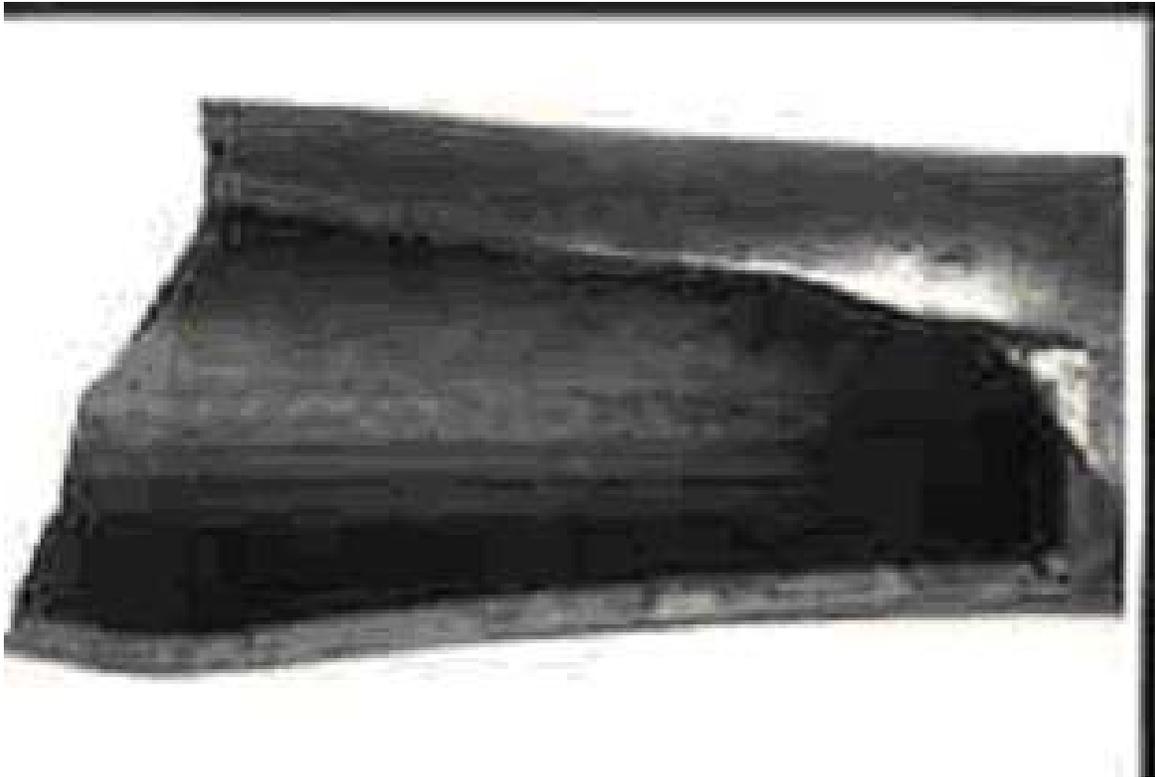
Brittle appearing failure of a pipe section due to HTHA.
